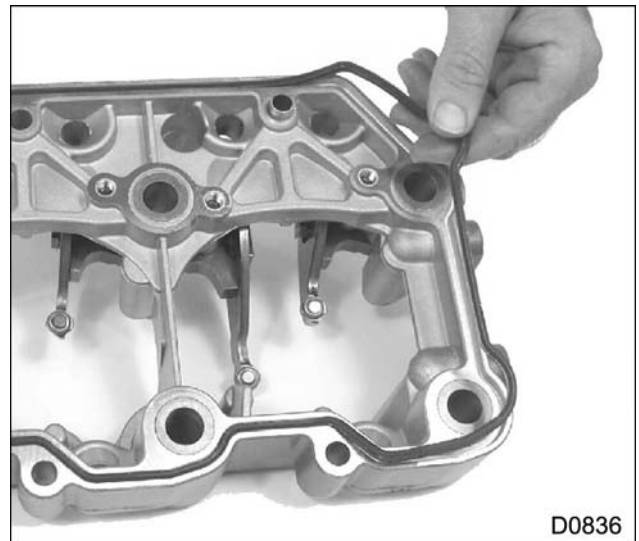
Installing the cylinder head to rocker arm carrier gasket
